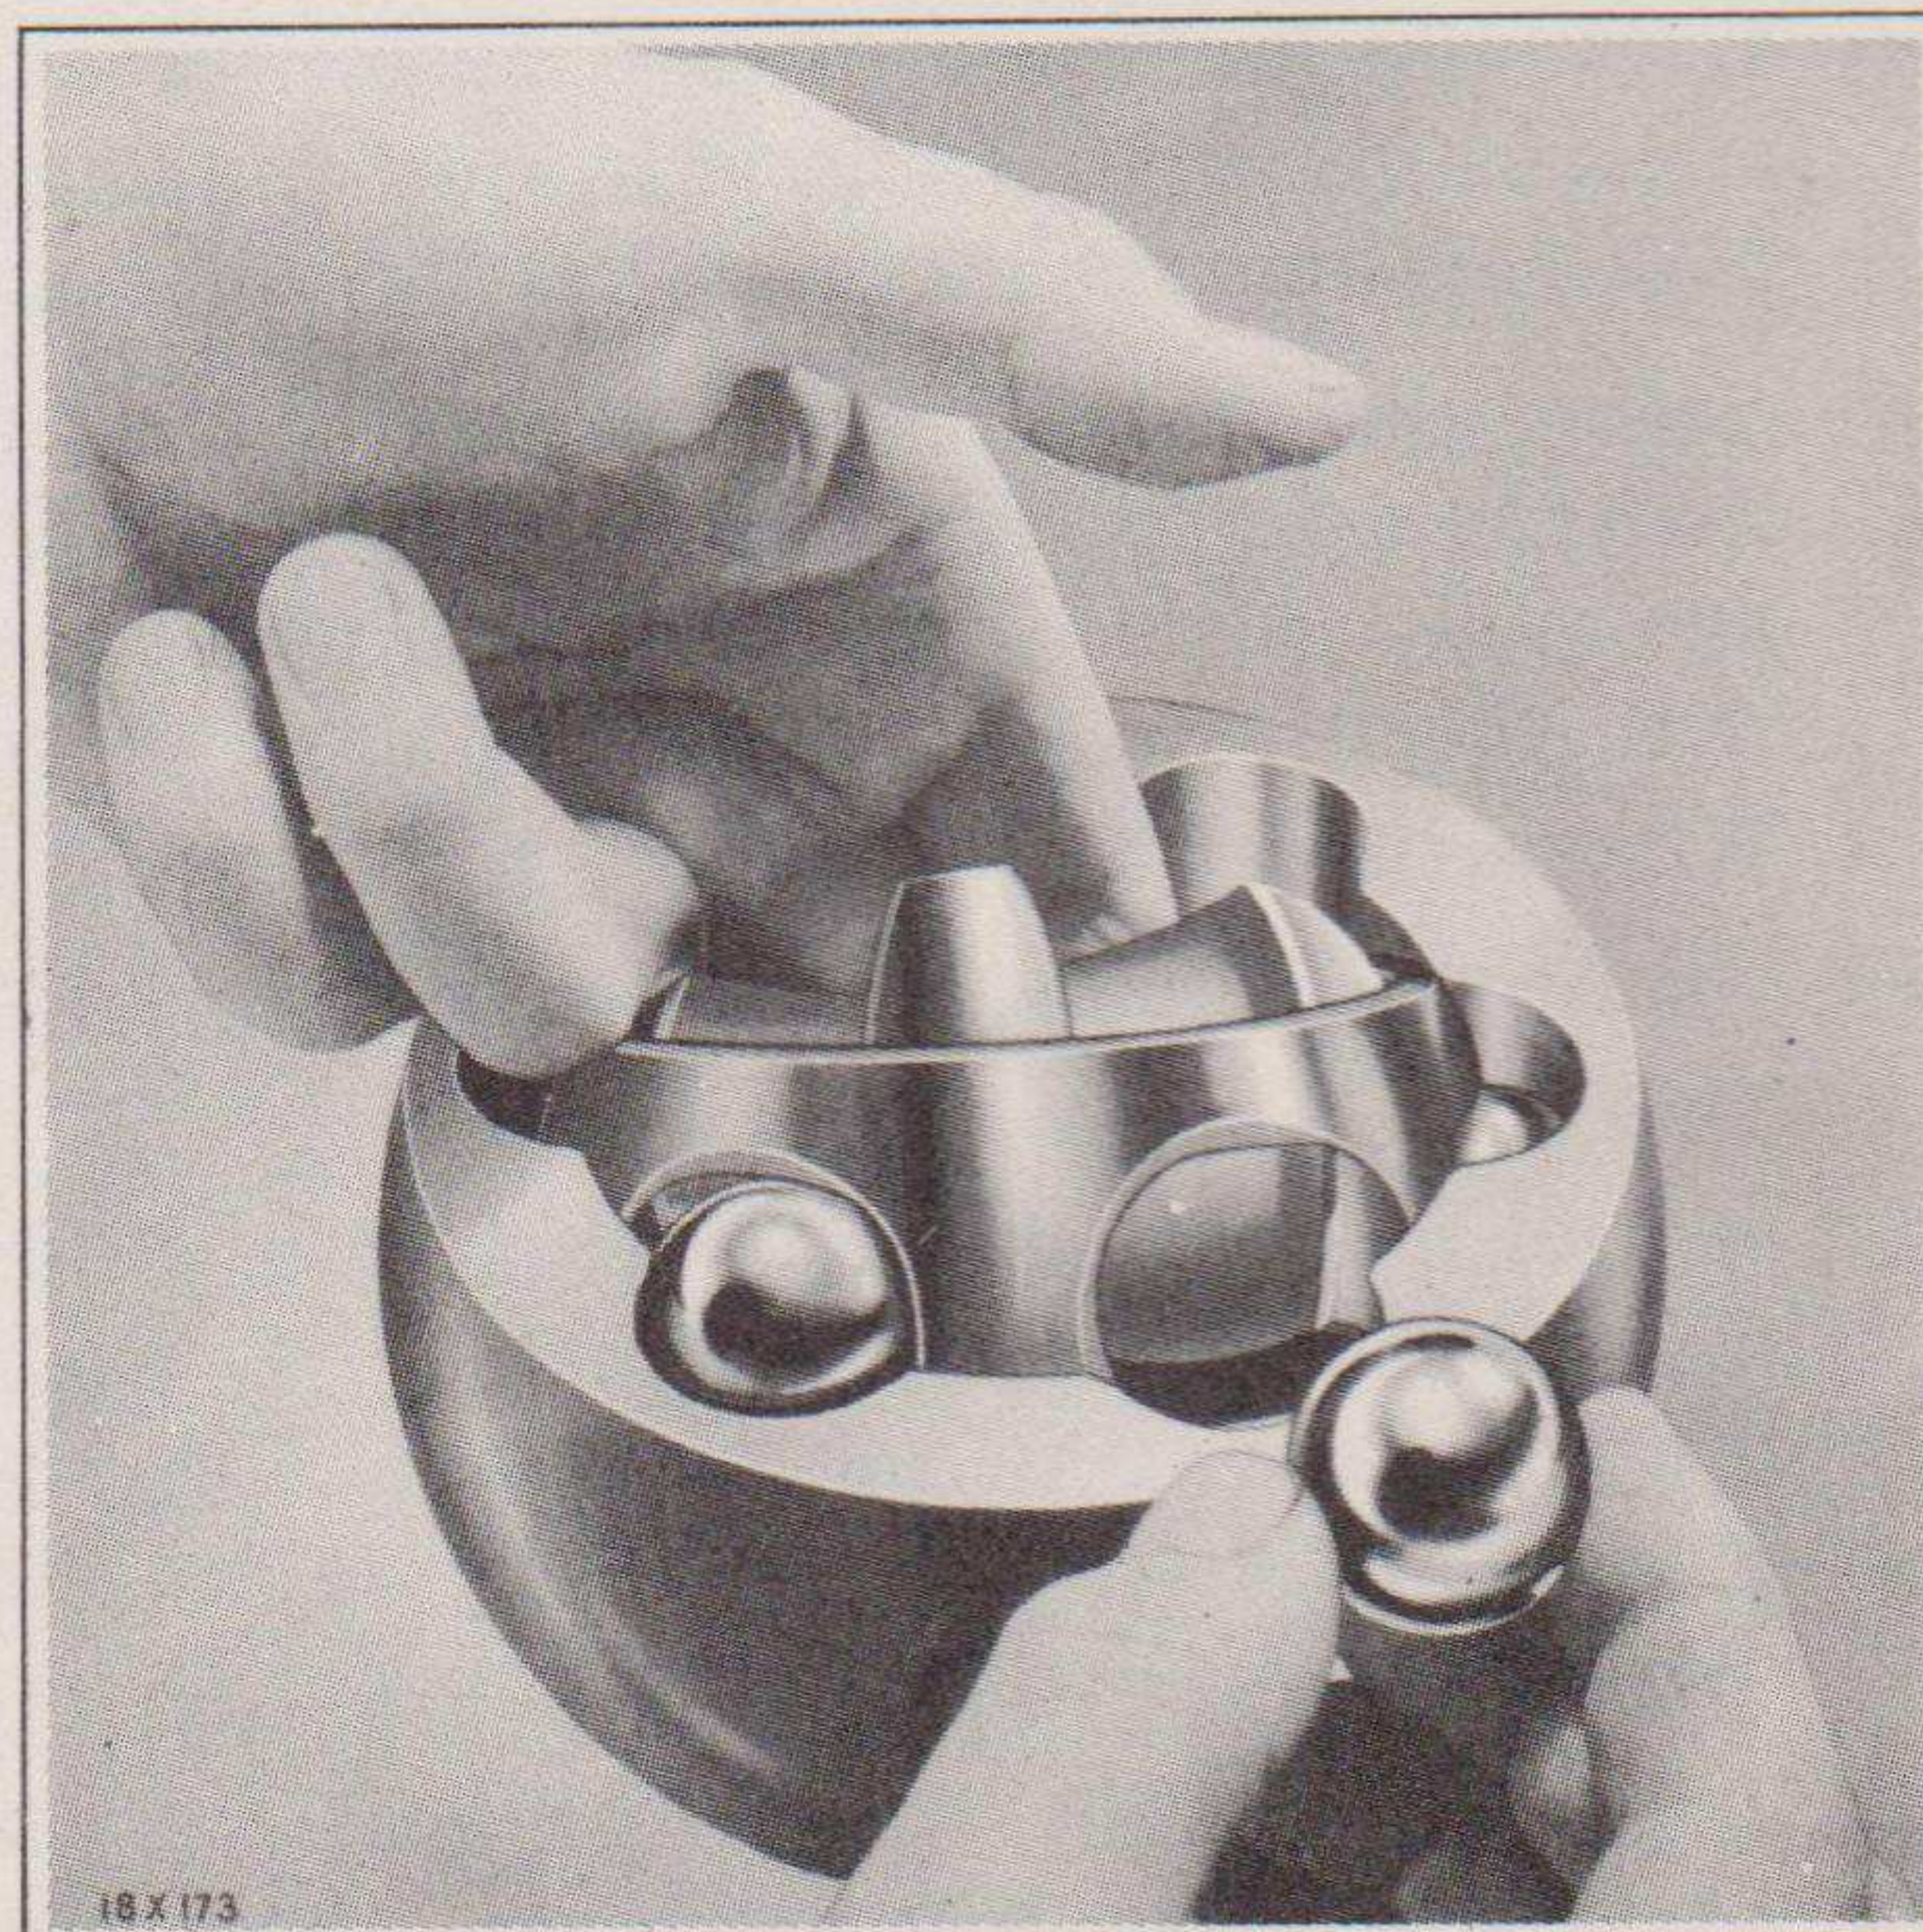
Removing Universal Drive Ball (Rzeppa)
